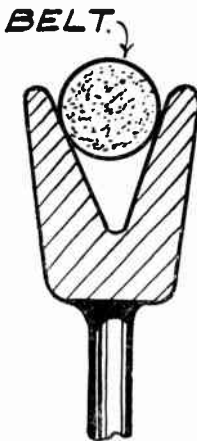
SECTION OF A V GROOVE PULLEY FOR ROUND BELTS.
